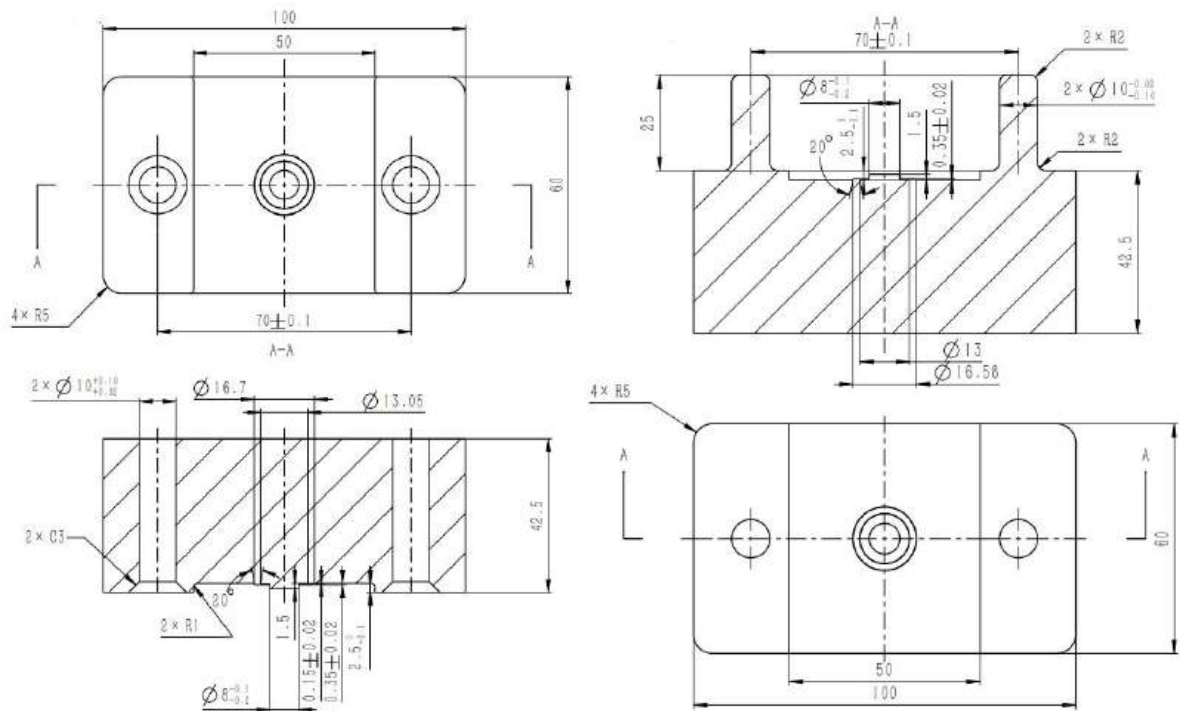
Two-dimensional dimensional drawing of the cold extrusion die
